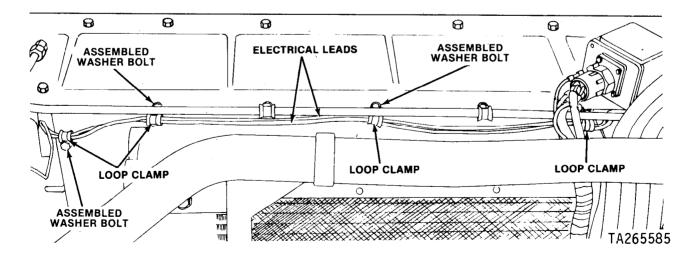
Removing or Installing Starter, Smoke and Dust Detector Electrical Cable
